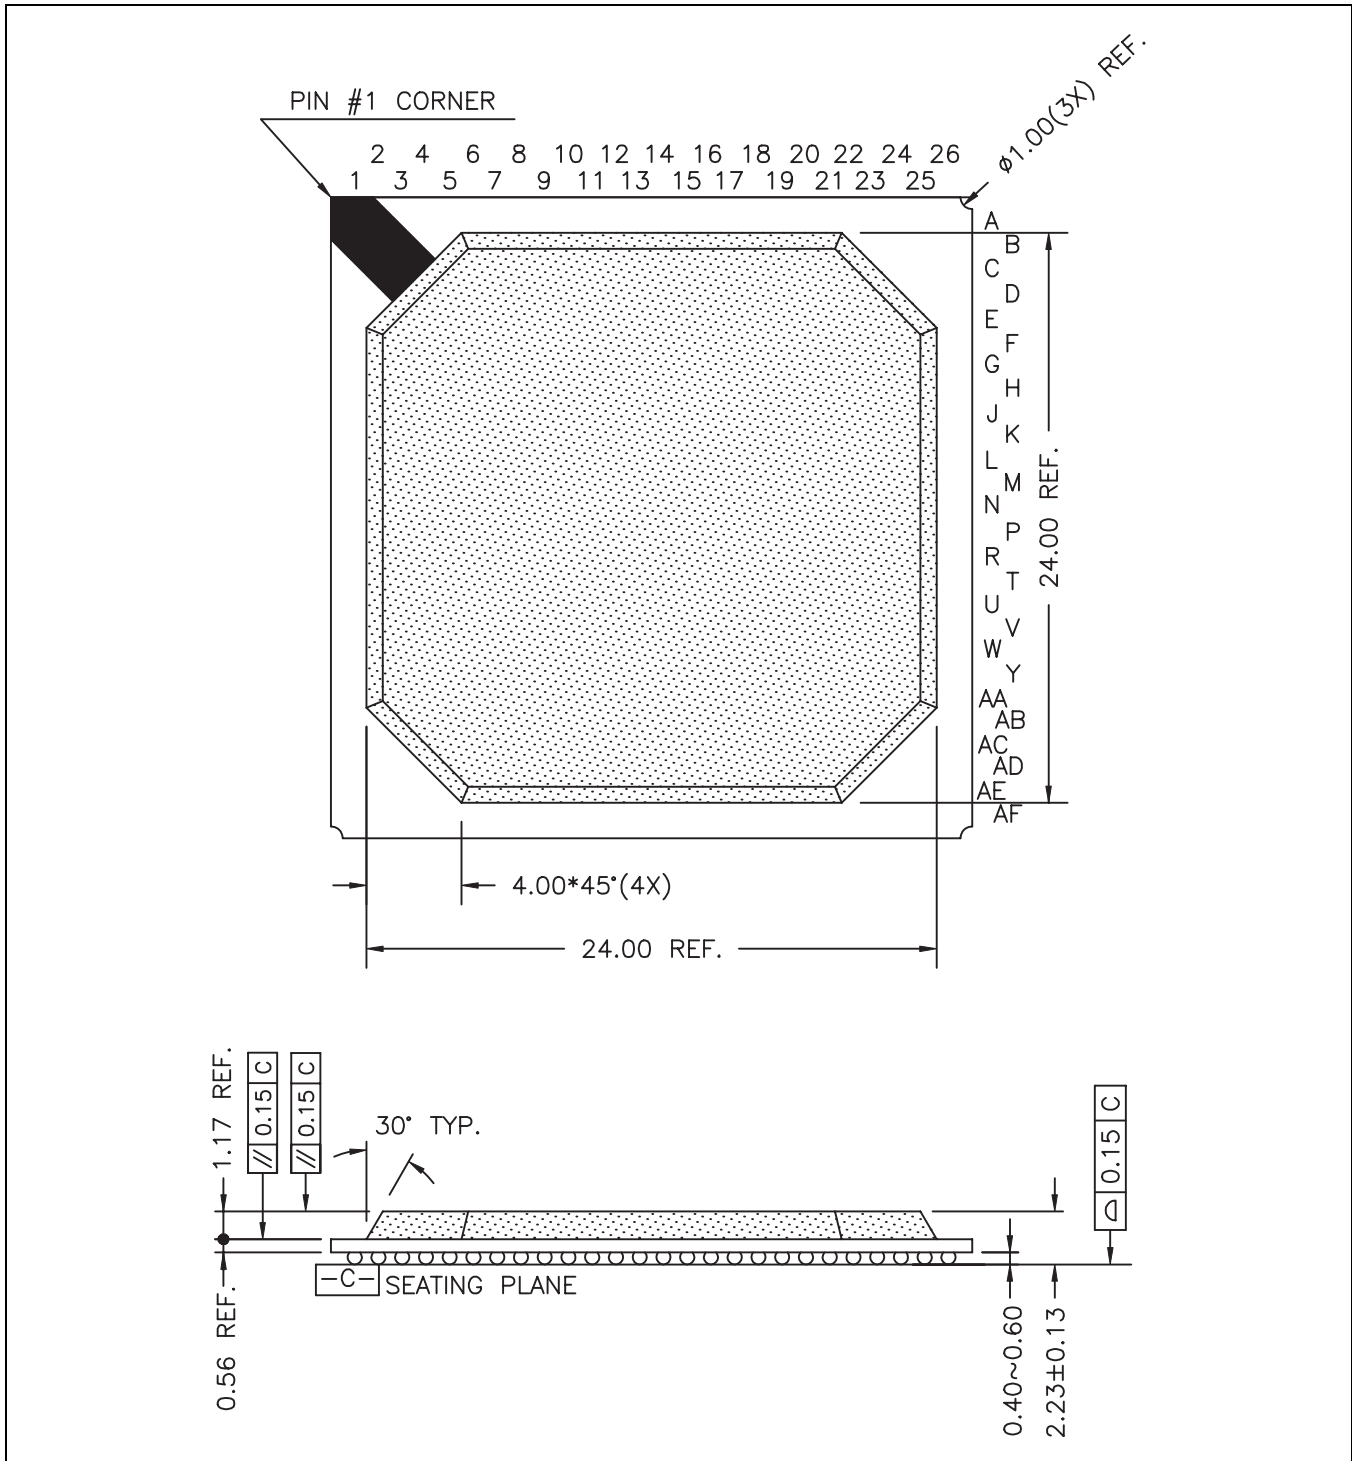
M28525/9 Mechanical Drawing (Top and Side Views)
